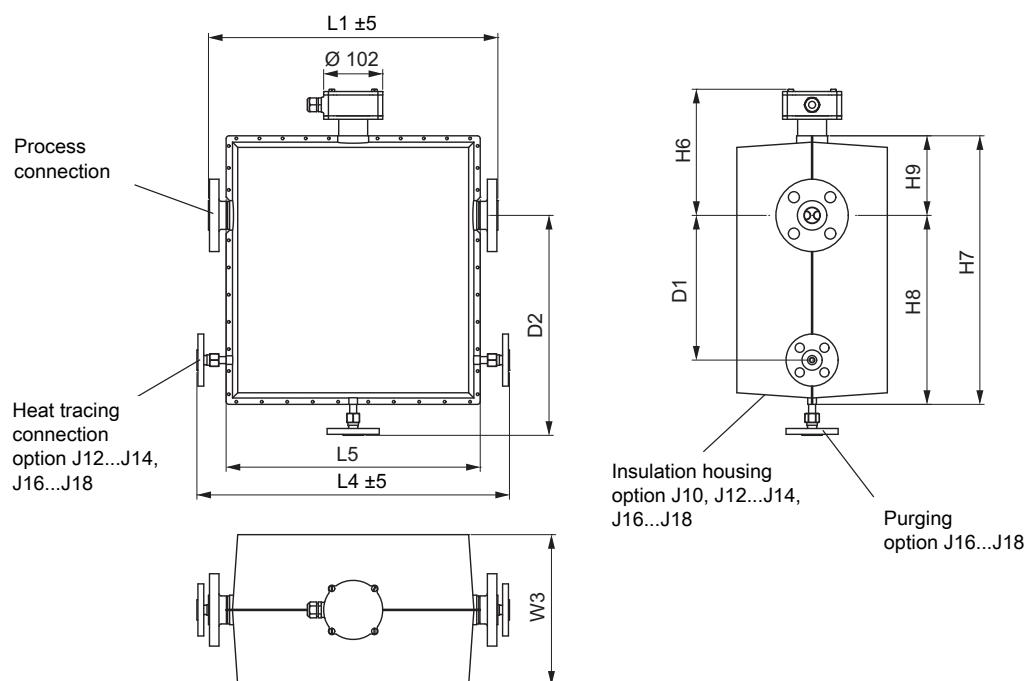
Dimensions in mm: version with insulation housing for meter sizes FCS600 DN15, DN25 and DN40 only
